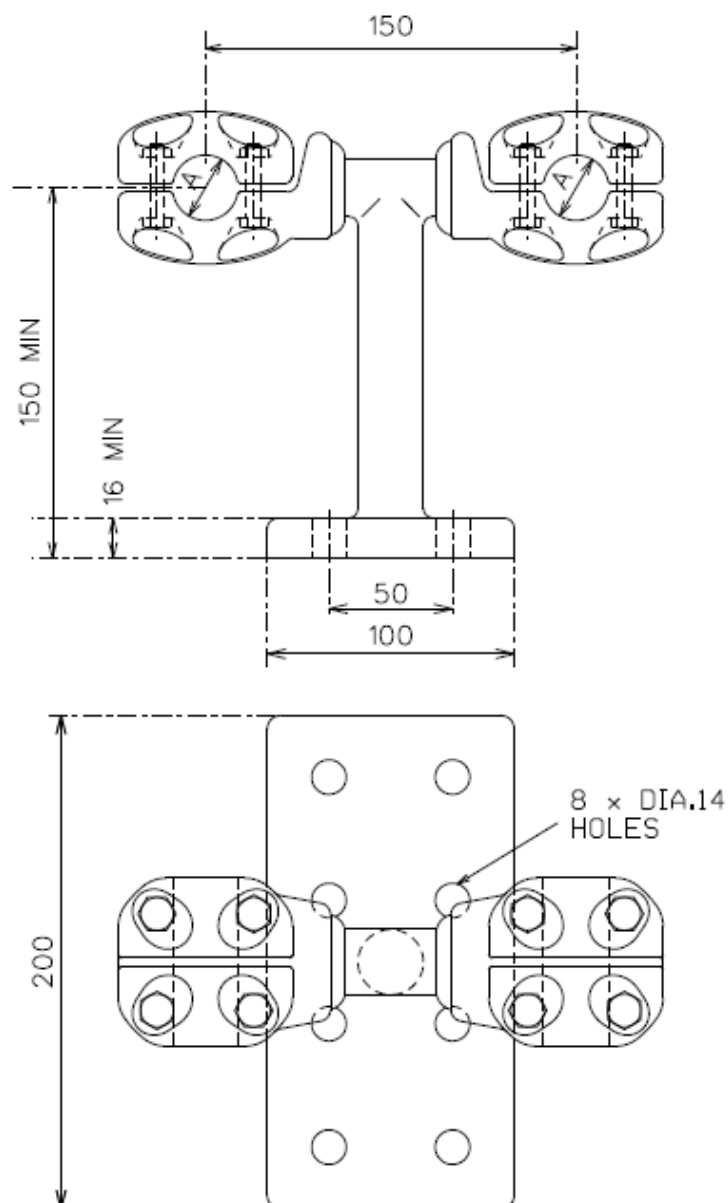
EPTT2 Twin conductor bolted support clamp on 8-hole pad to fit 8-hole terminal
